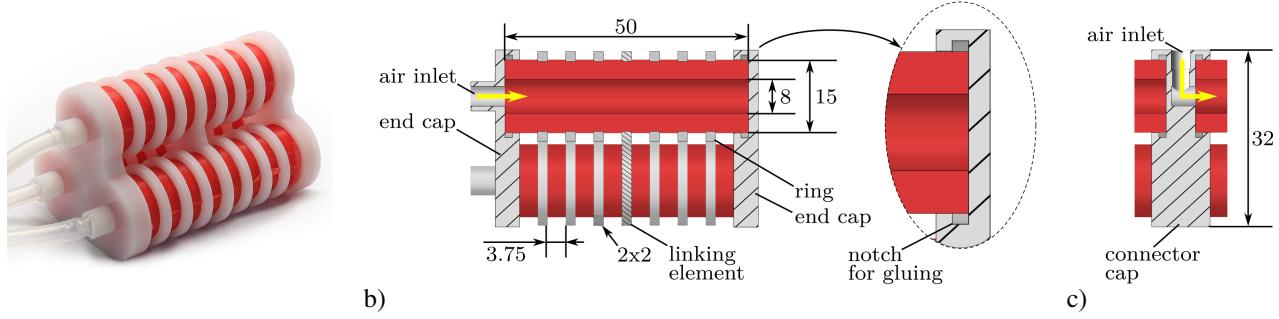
Modular actuator assembled a), its dimensions and name of its components b), and a connector cap that can be used instead of an end cap to stack modules c). The sideview shows a cut through the middle plane of the actuator.
